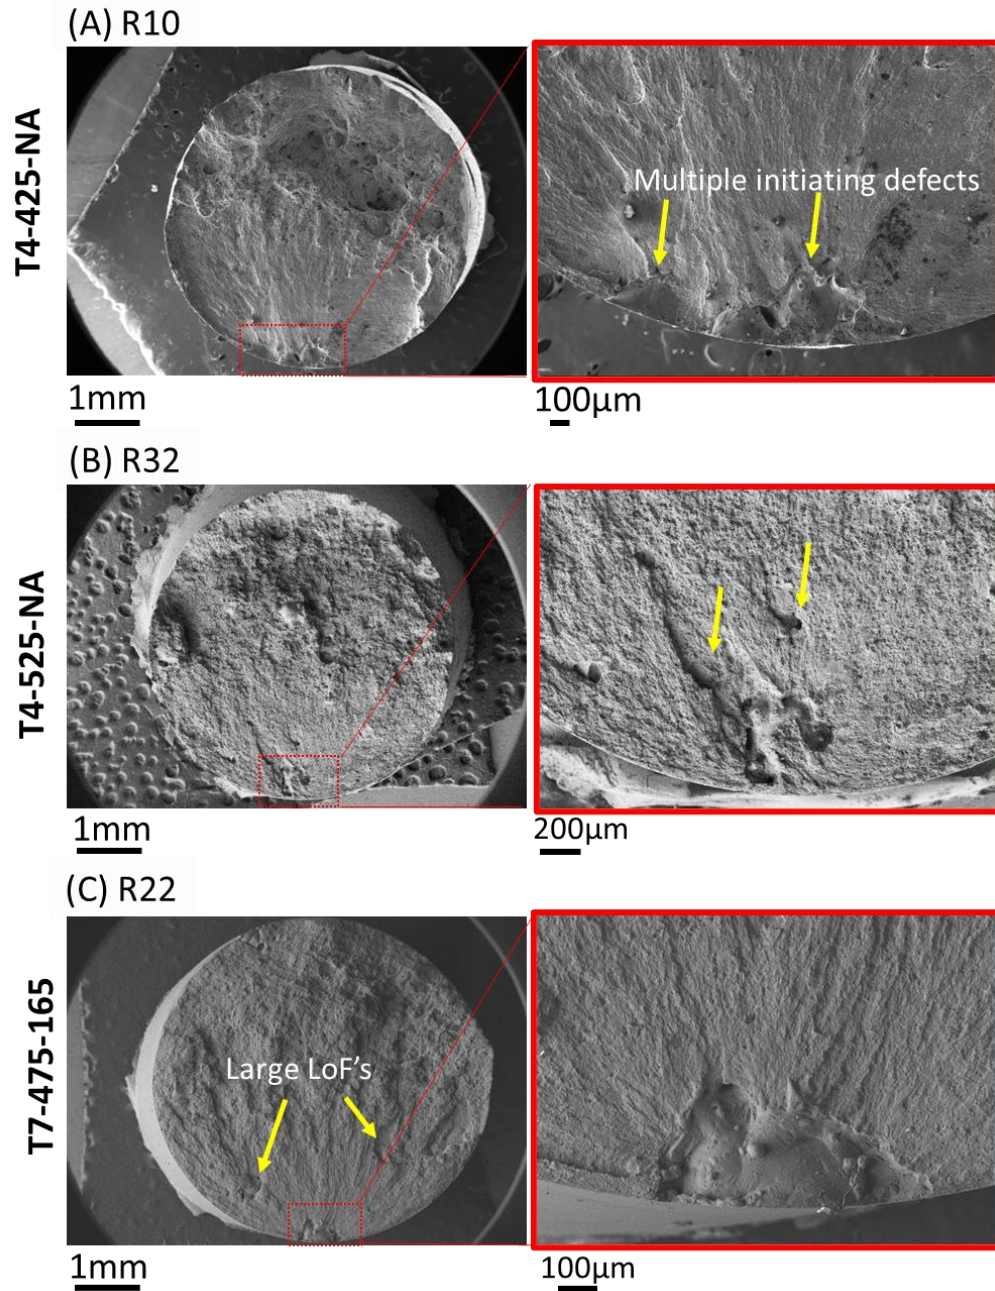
Fatigue fracture surfaces for L-PBF specimens fabricated on Renishaw AM 250 and tested at $\sigma_{max}=90$ MPa and $R=0.1$ for: (A) T4-425-NA, (B) T4-525-NA, and (C) T7-475-165 conditions.
